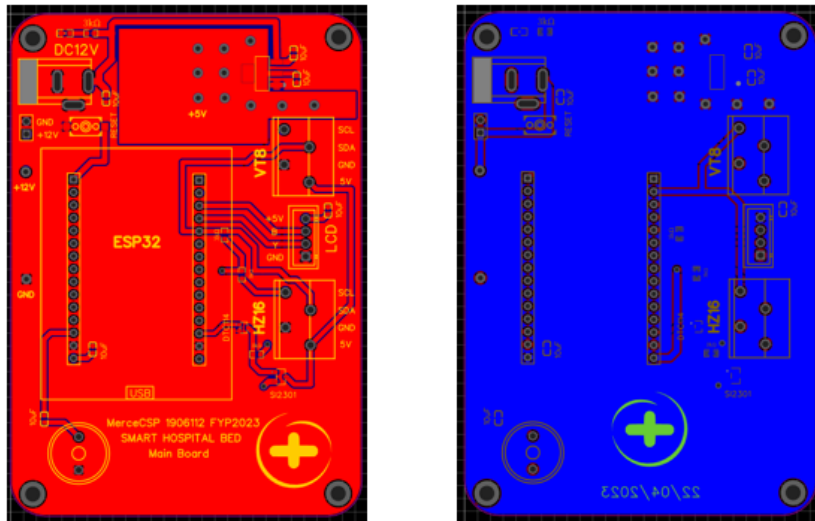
PCB for Main Board: Front View (Left), Back View (Right)
